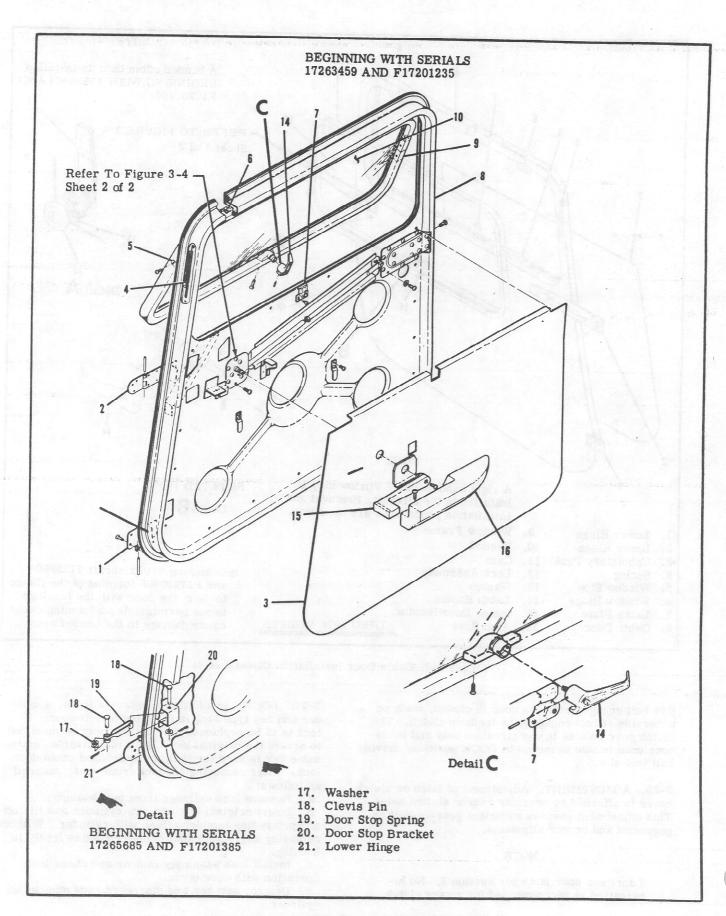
Cabin Door Installation (Sheet 2 of 2)
